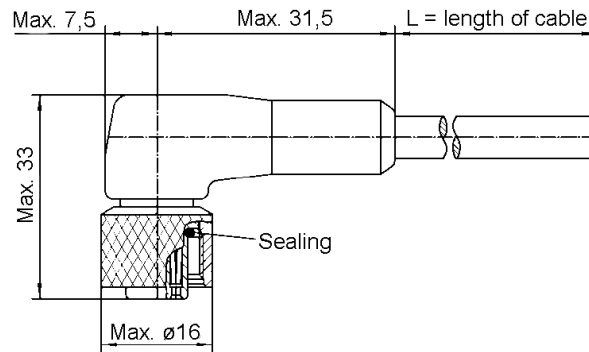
Non-rewireable connector, with female contacts right angled version, with locking nut
